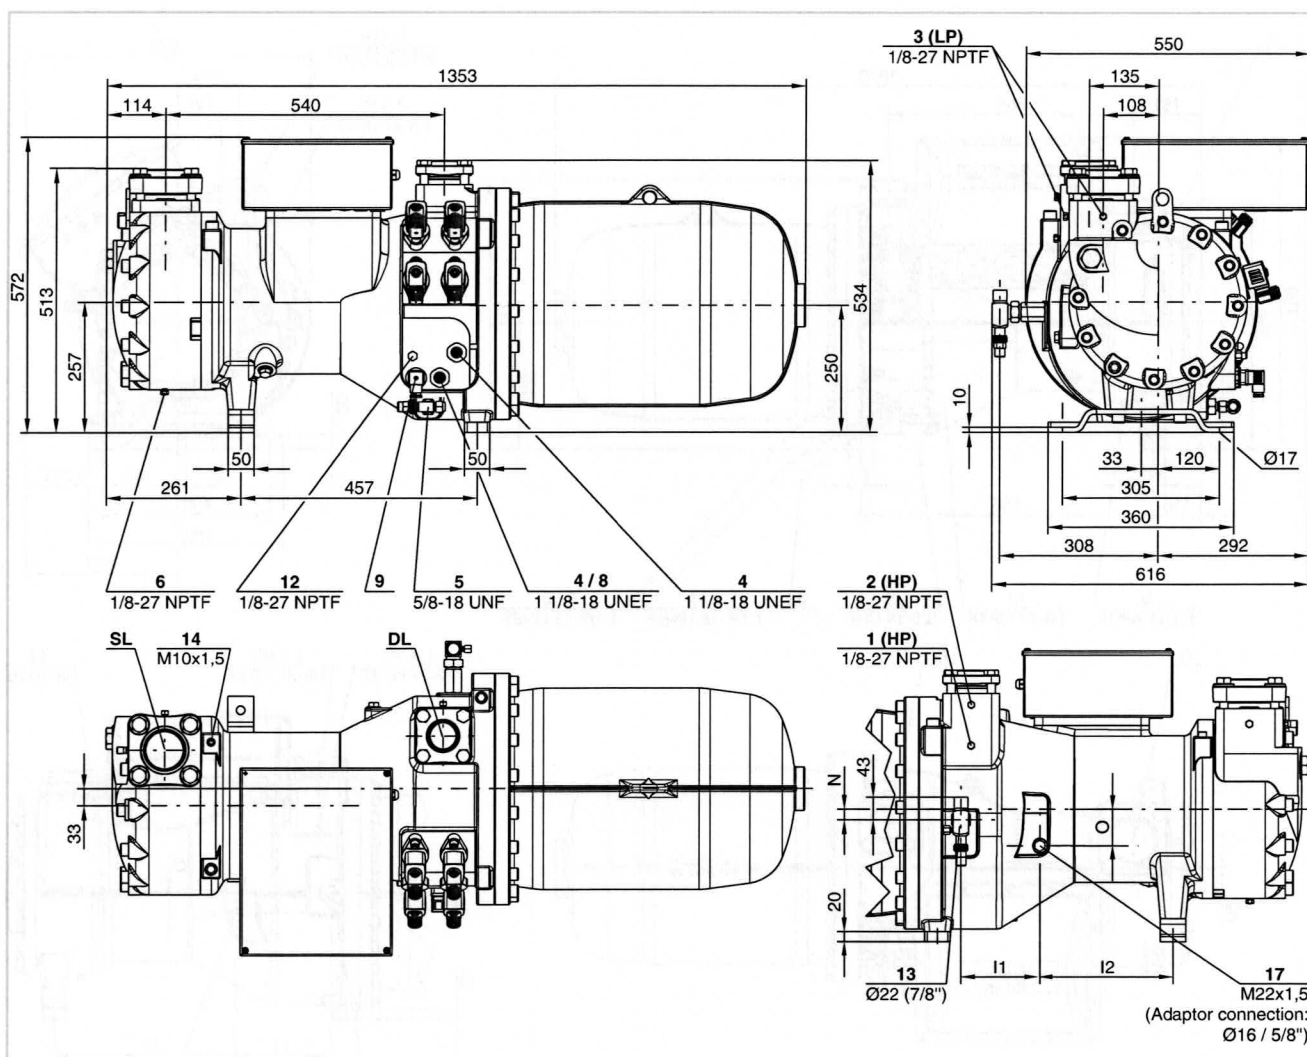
Dimensional drawing CSW7573-60Y .. CSW7593-90(Y), CSH7673-70Y .. CSH7693-90Y
